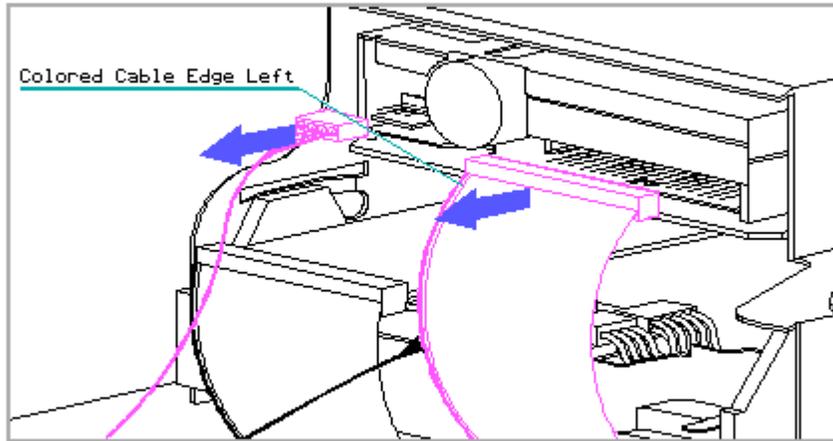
Disconnecting the Cables from the 3.5-Inch Diskette Drive
